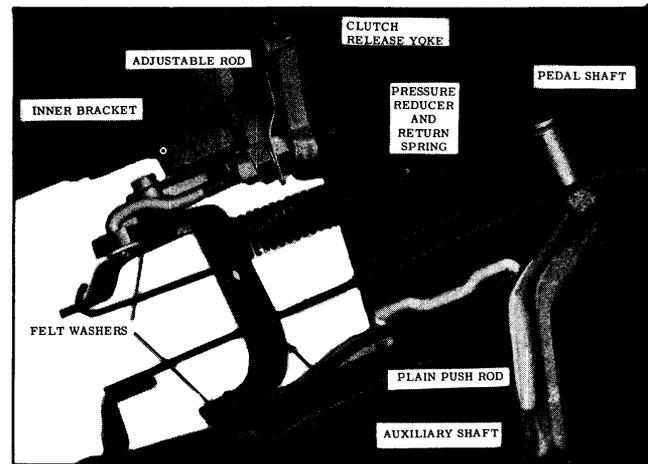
Clutch Auxiliary Shaft Assembly
